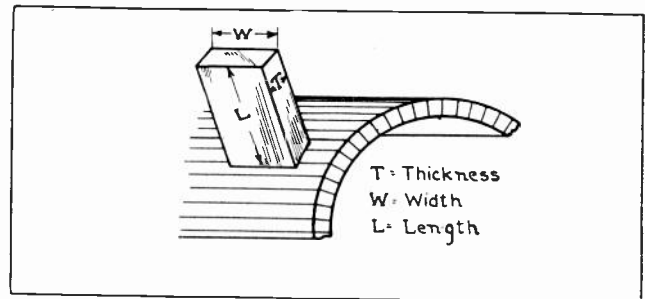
This sketch illustrates the method of taking measurement for the length, width, and thickness of carbon brushes.
